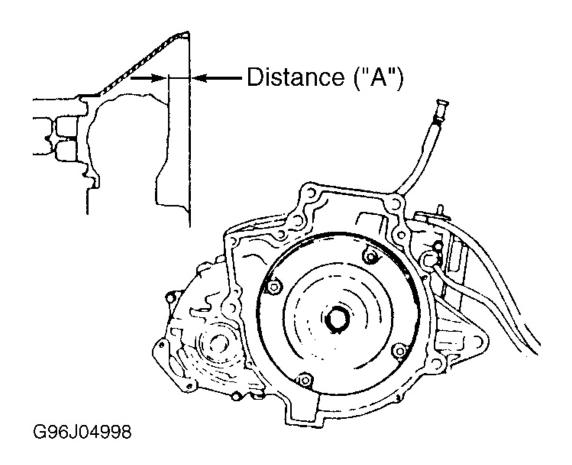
Checking Reverse, Coasting & Forward Drum Installation Courtesy of MAZDA MOTORS CORP.
